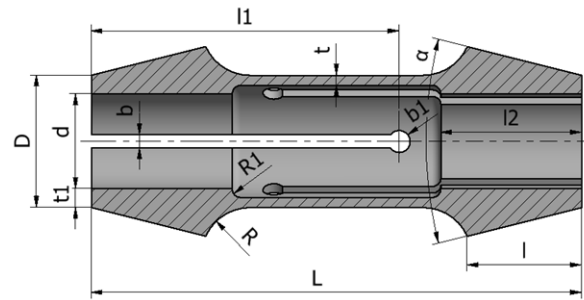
The main dimensions of the bilateral chuck collets with direct cone
